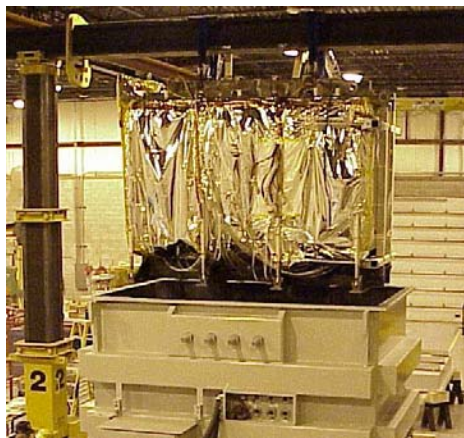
Installation of coil assembly with multiple-layer insulation into vacuum tank.
